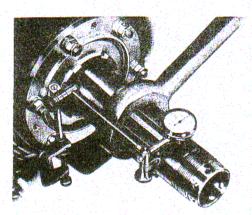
Checking Crankshaft Run-out at Front Cone Location
